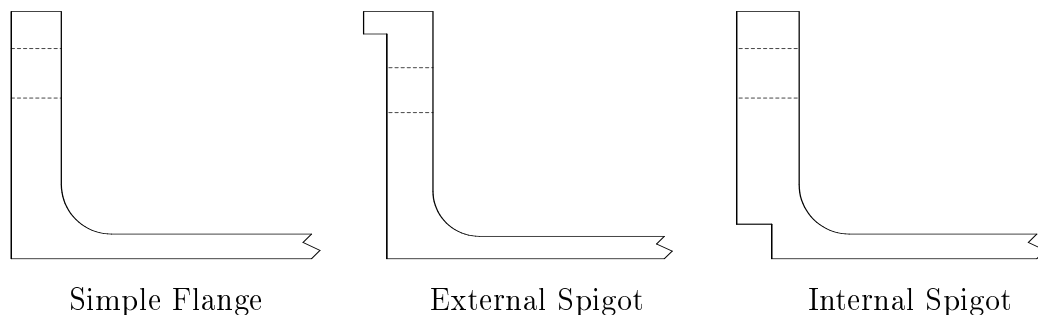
Cross-section of Geometry for Three Basic Flanges
